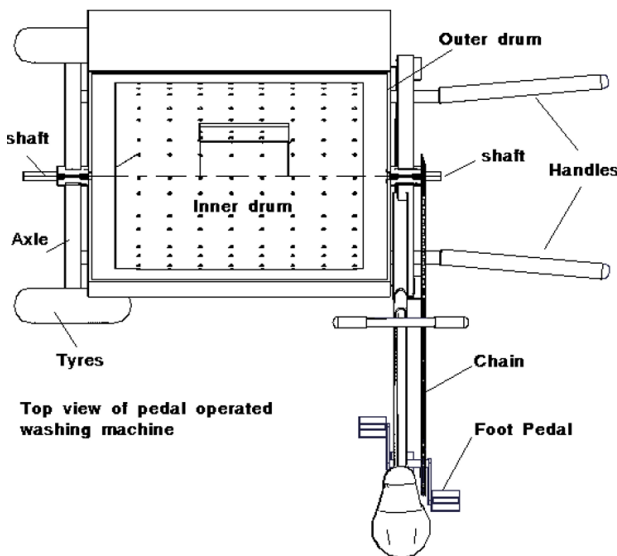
Top view AutoCAD model of pedal operated washing machine
